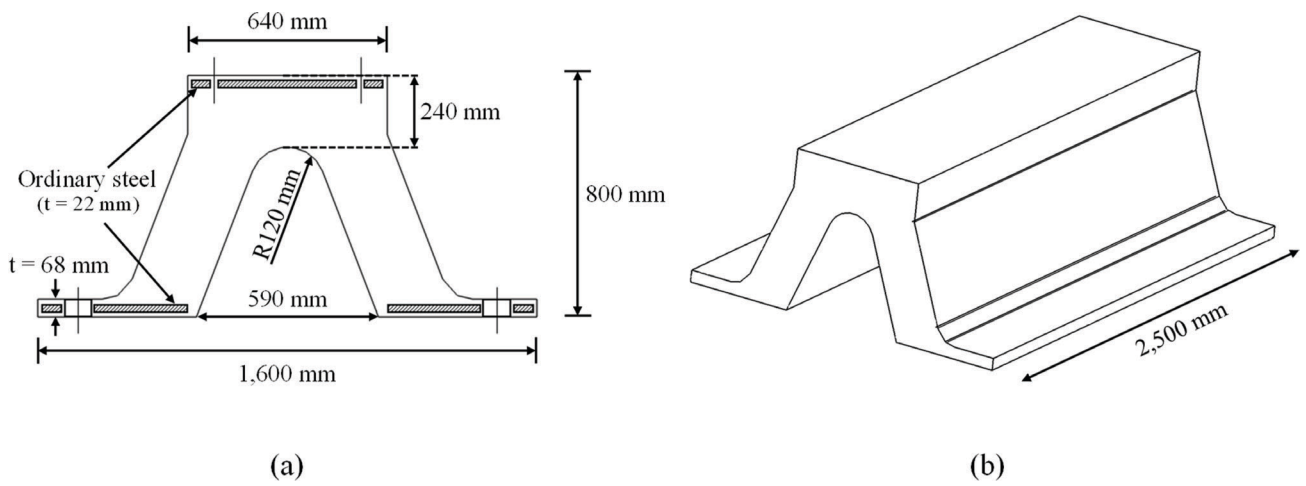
Dimensions of V-shaped rubber fender used for crushing test: (a) front view, and (b) isometric view
